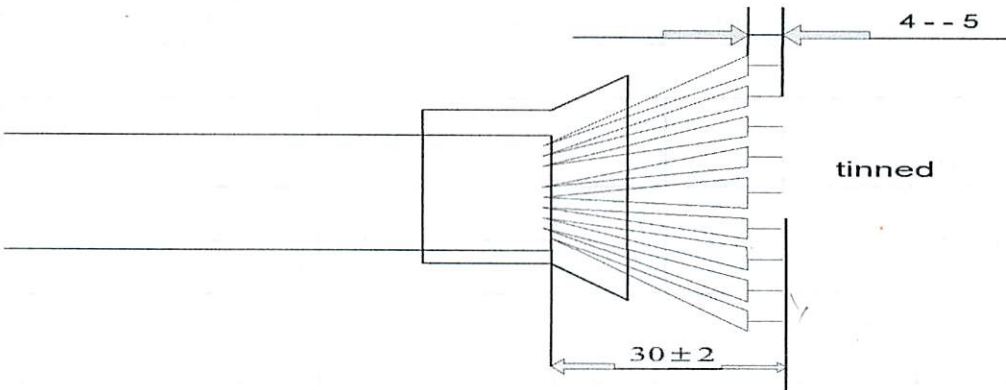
USB-RS422-WE Mechanical Details (dimensions in mm)
